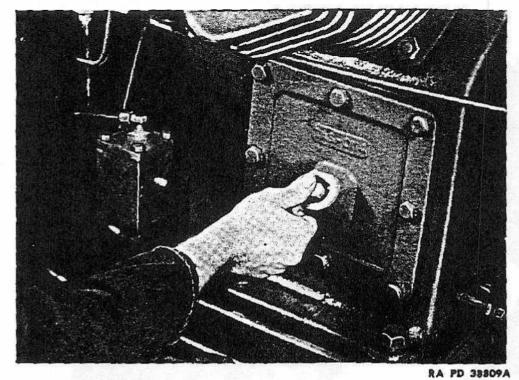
Pressing Down Oil Gage for Proper Oil Level Reading
